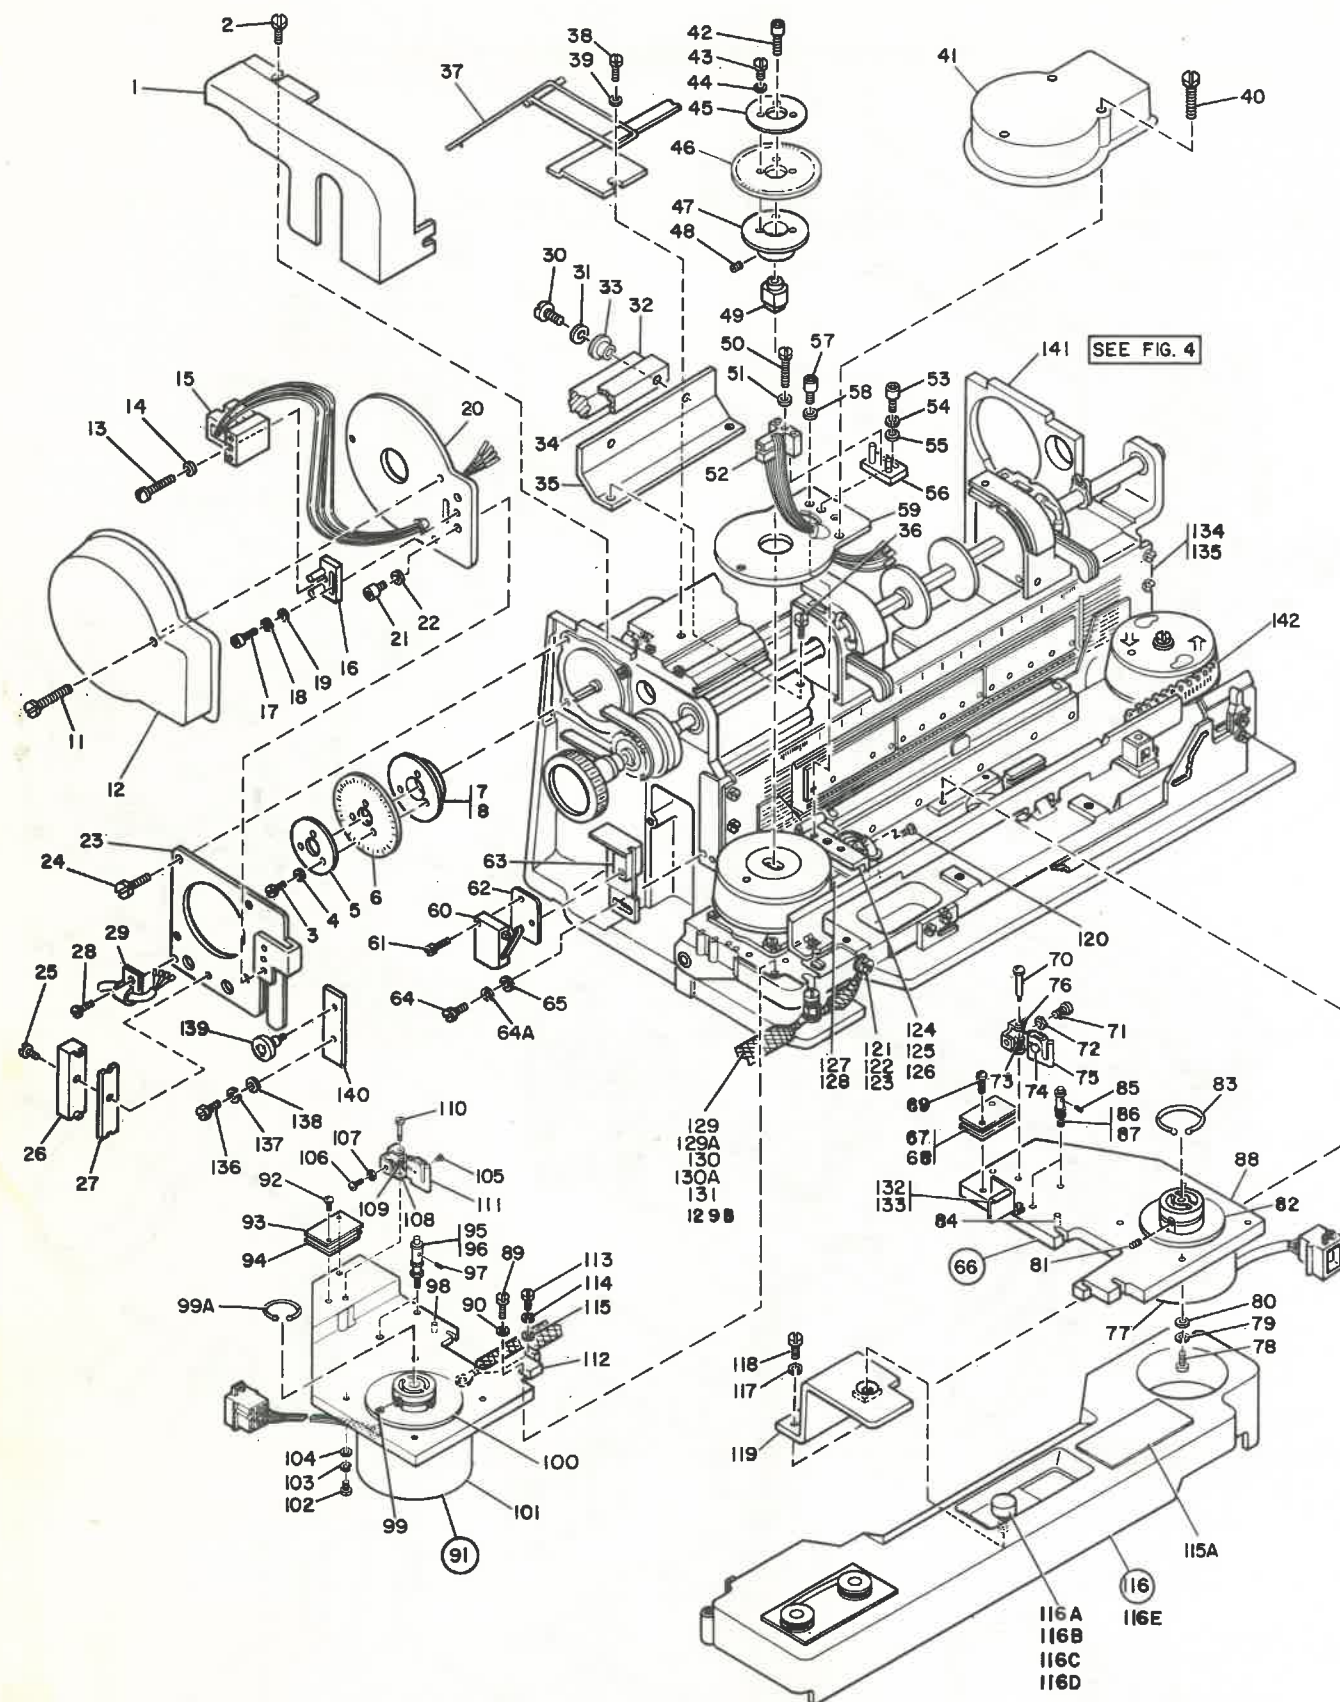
MECHANISM FINAL ASSEMBLY. SEE LIST 3.
